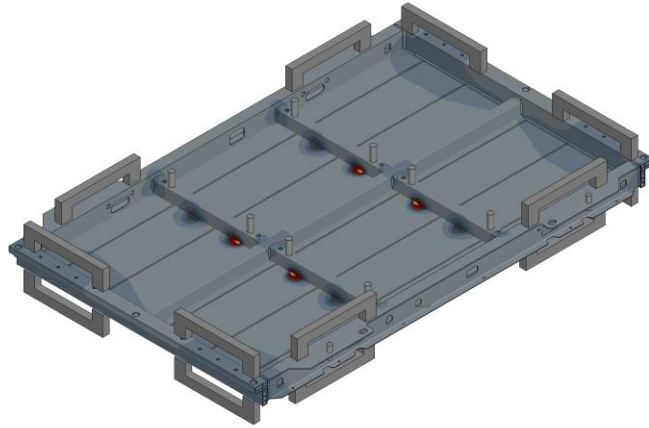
Floor assembly carrier, welding of the third and final station
